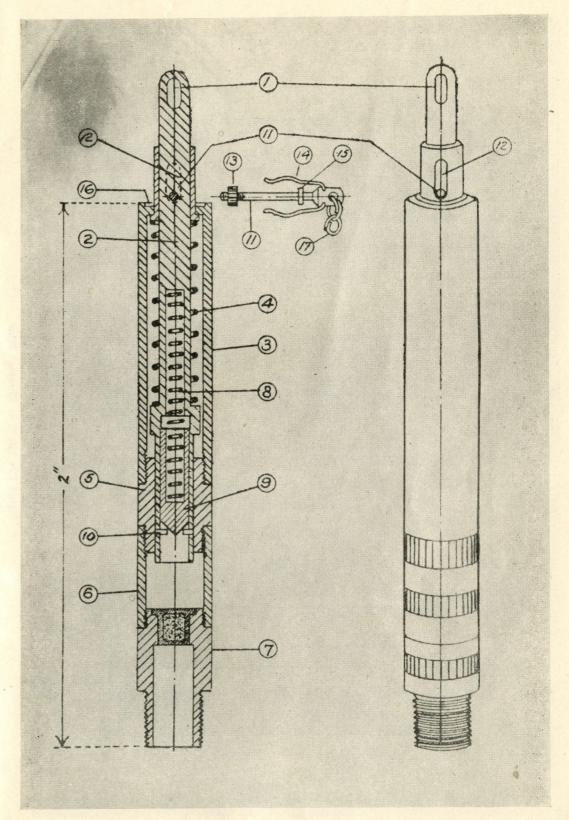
Figure III. Igniter, Pull and Tension Wire Type Z.u.Z.Z. 35, Sectional View
